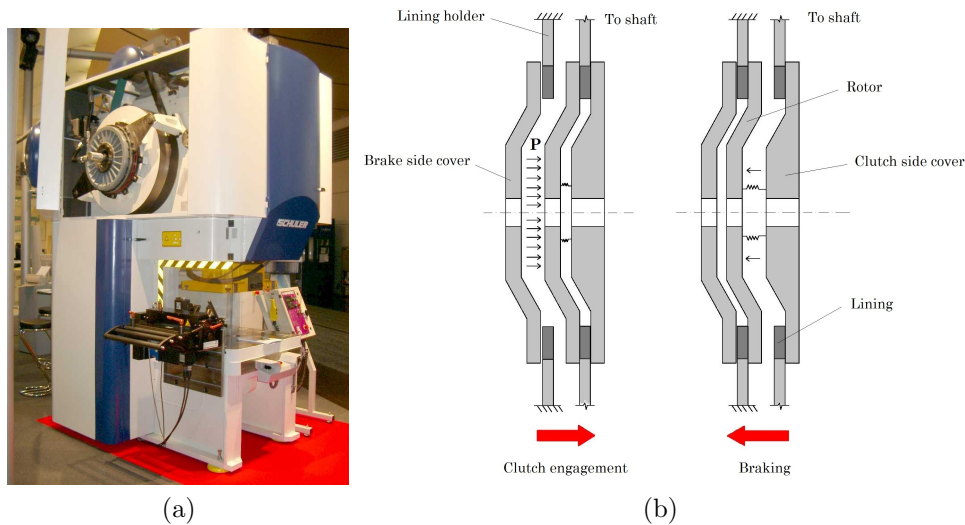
(a) A brake-clutch in a punch-press, its typical application in industry; (b) schematic of the brake-clutch showing its main parts and functioning
